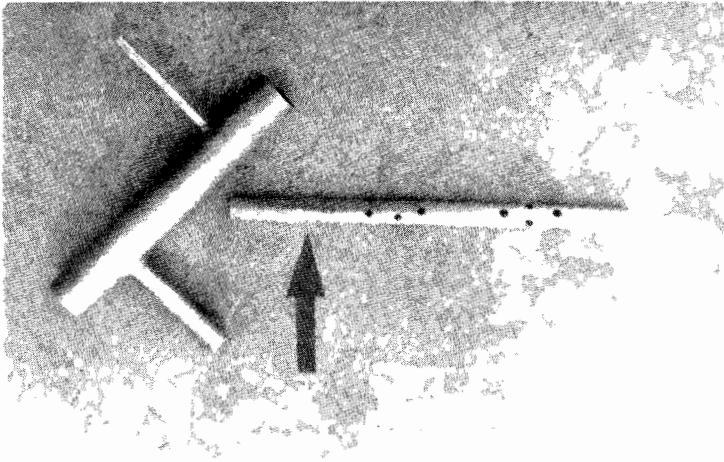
Using the twin carbon-arc torch pieces of 10 mm diameter and 5 mm diameter copper tubing were brazed at right angles to a piece of 16 mm diameter copper tubing. At the point of the arrow the 10 mm diameter copper tubes were brazed end to end.
